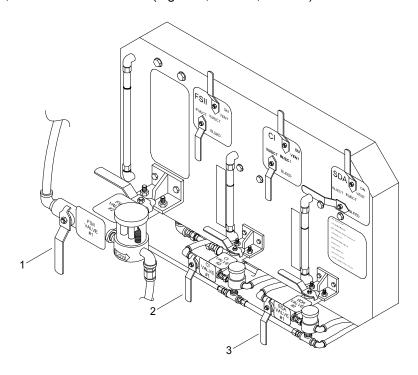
Fuel Additive Injector Assembly Supply Valves.
